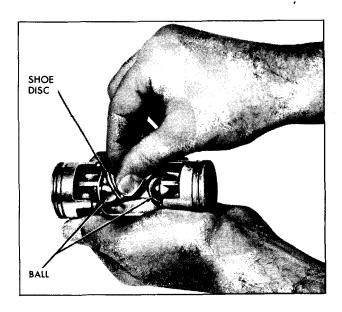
A-85 Zero Shoe and Ball at Front of Piston
